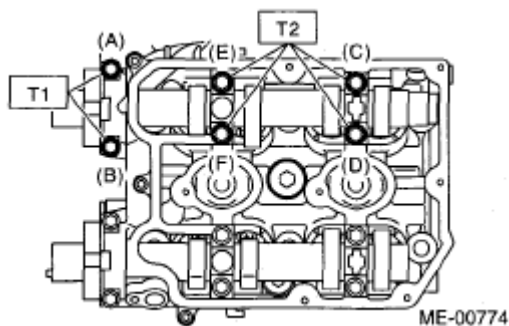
Identifying Camshaft Bearing Caps Bolts
